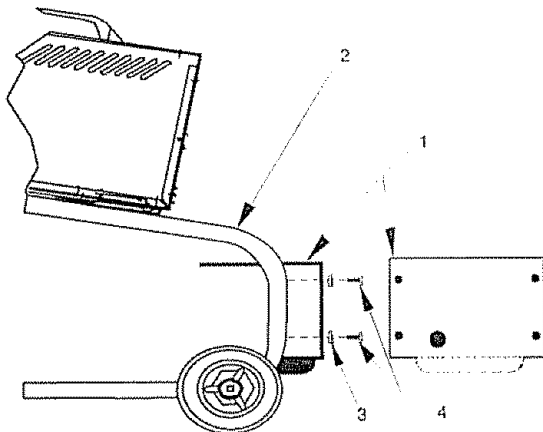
Mount Tank Tray Bracket To Welder
